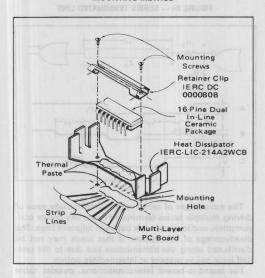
CHANNEL/WIPER HEATSINKING ON DOUBLE LAYER BOARD
